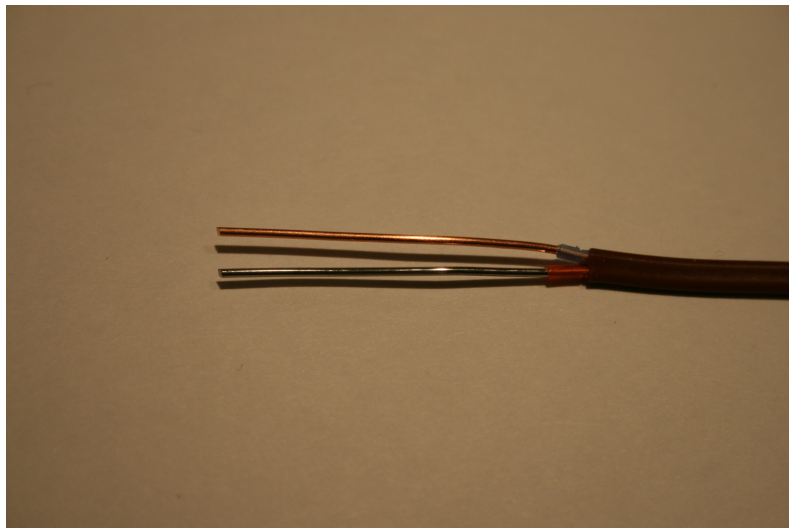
Thermocouple Manufacturing: Step 3. Thermocouple wire with the insulation stripped from the individual wires.
